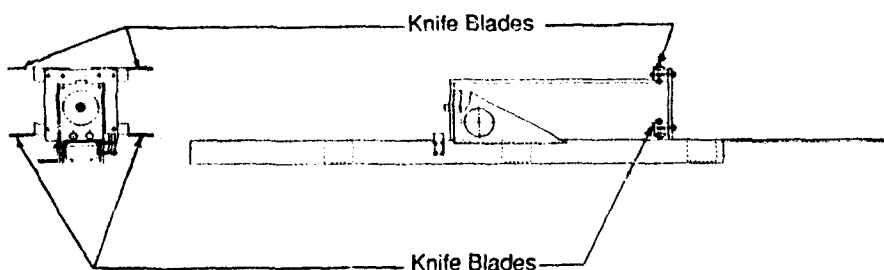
Rocket sled assembly, using knife blades (two per warhead charge) to transfer power to the sled [5]
